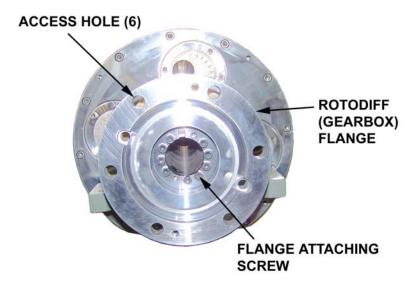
Rotodiff / Gearbox Flange Attachment
